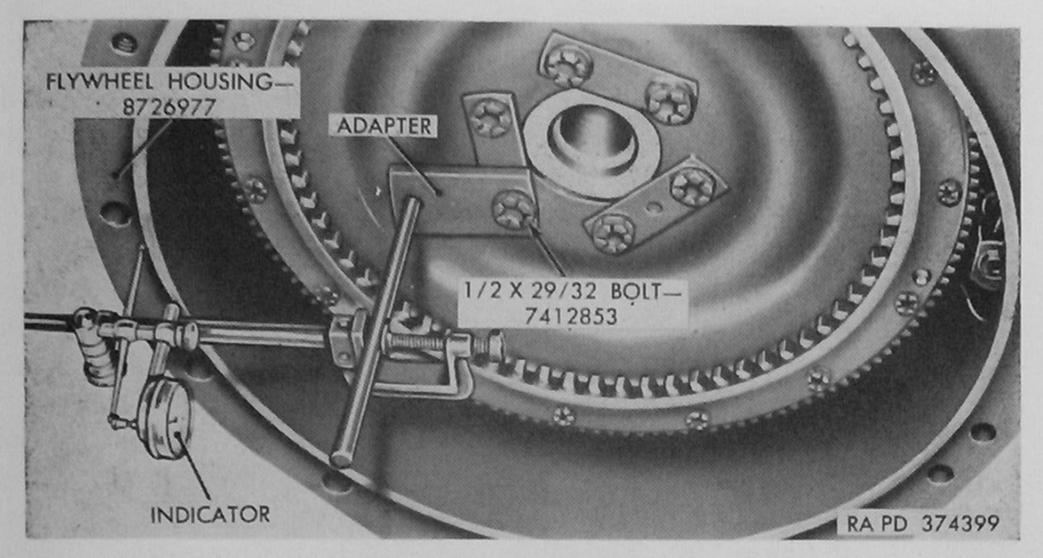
Checking pilot flange on flywheel housing—engine assembly 8726920
